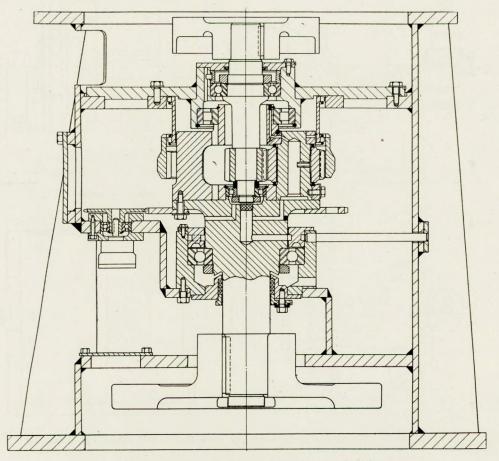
Sectional arrangement of gear shown in Fig. 18
